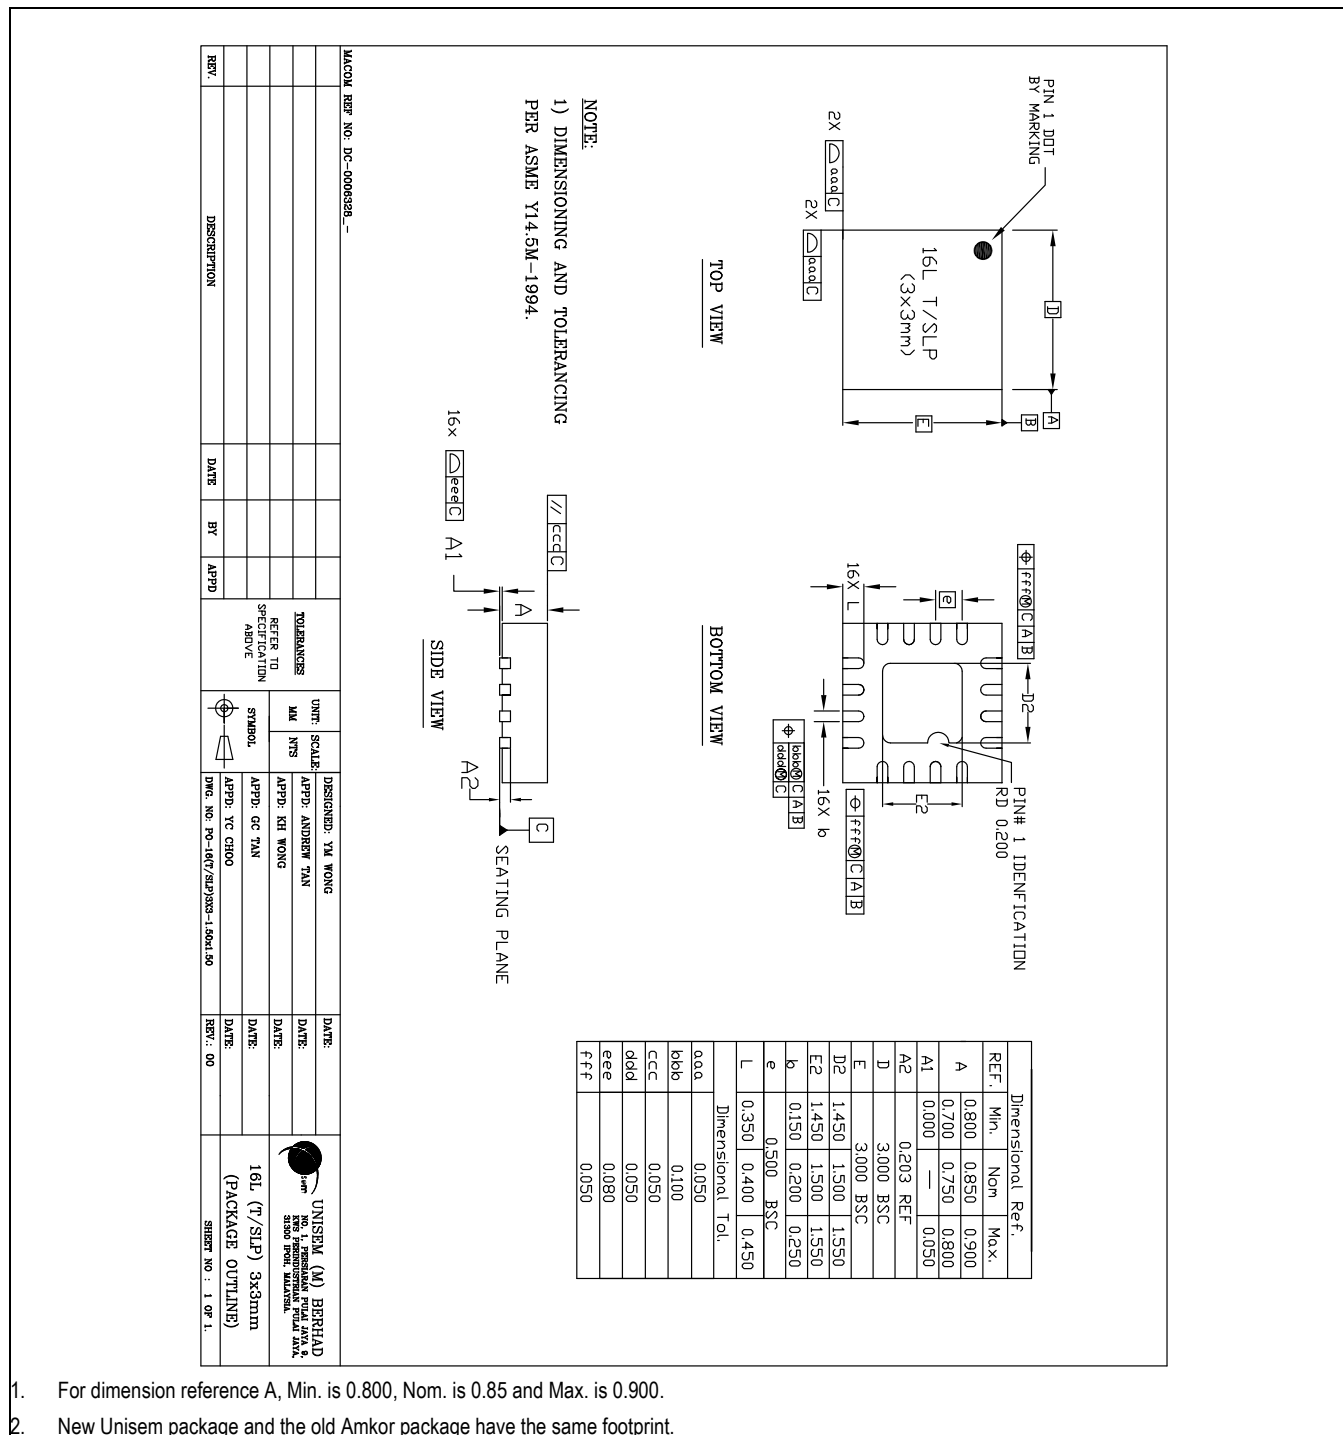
Package Drawing (3x3 mm MLF Package)
